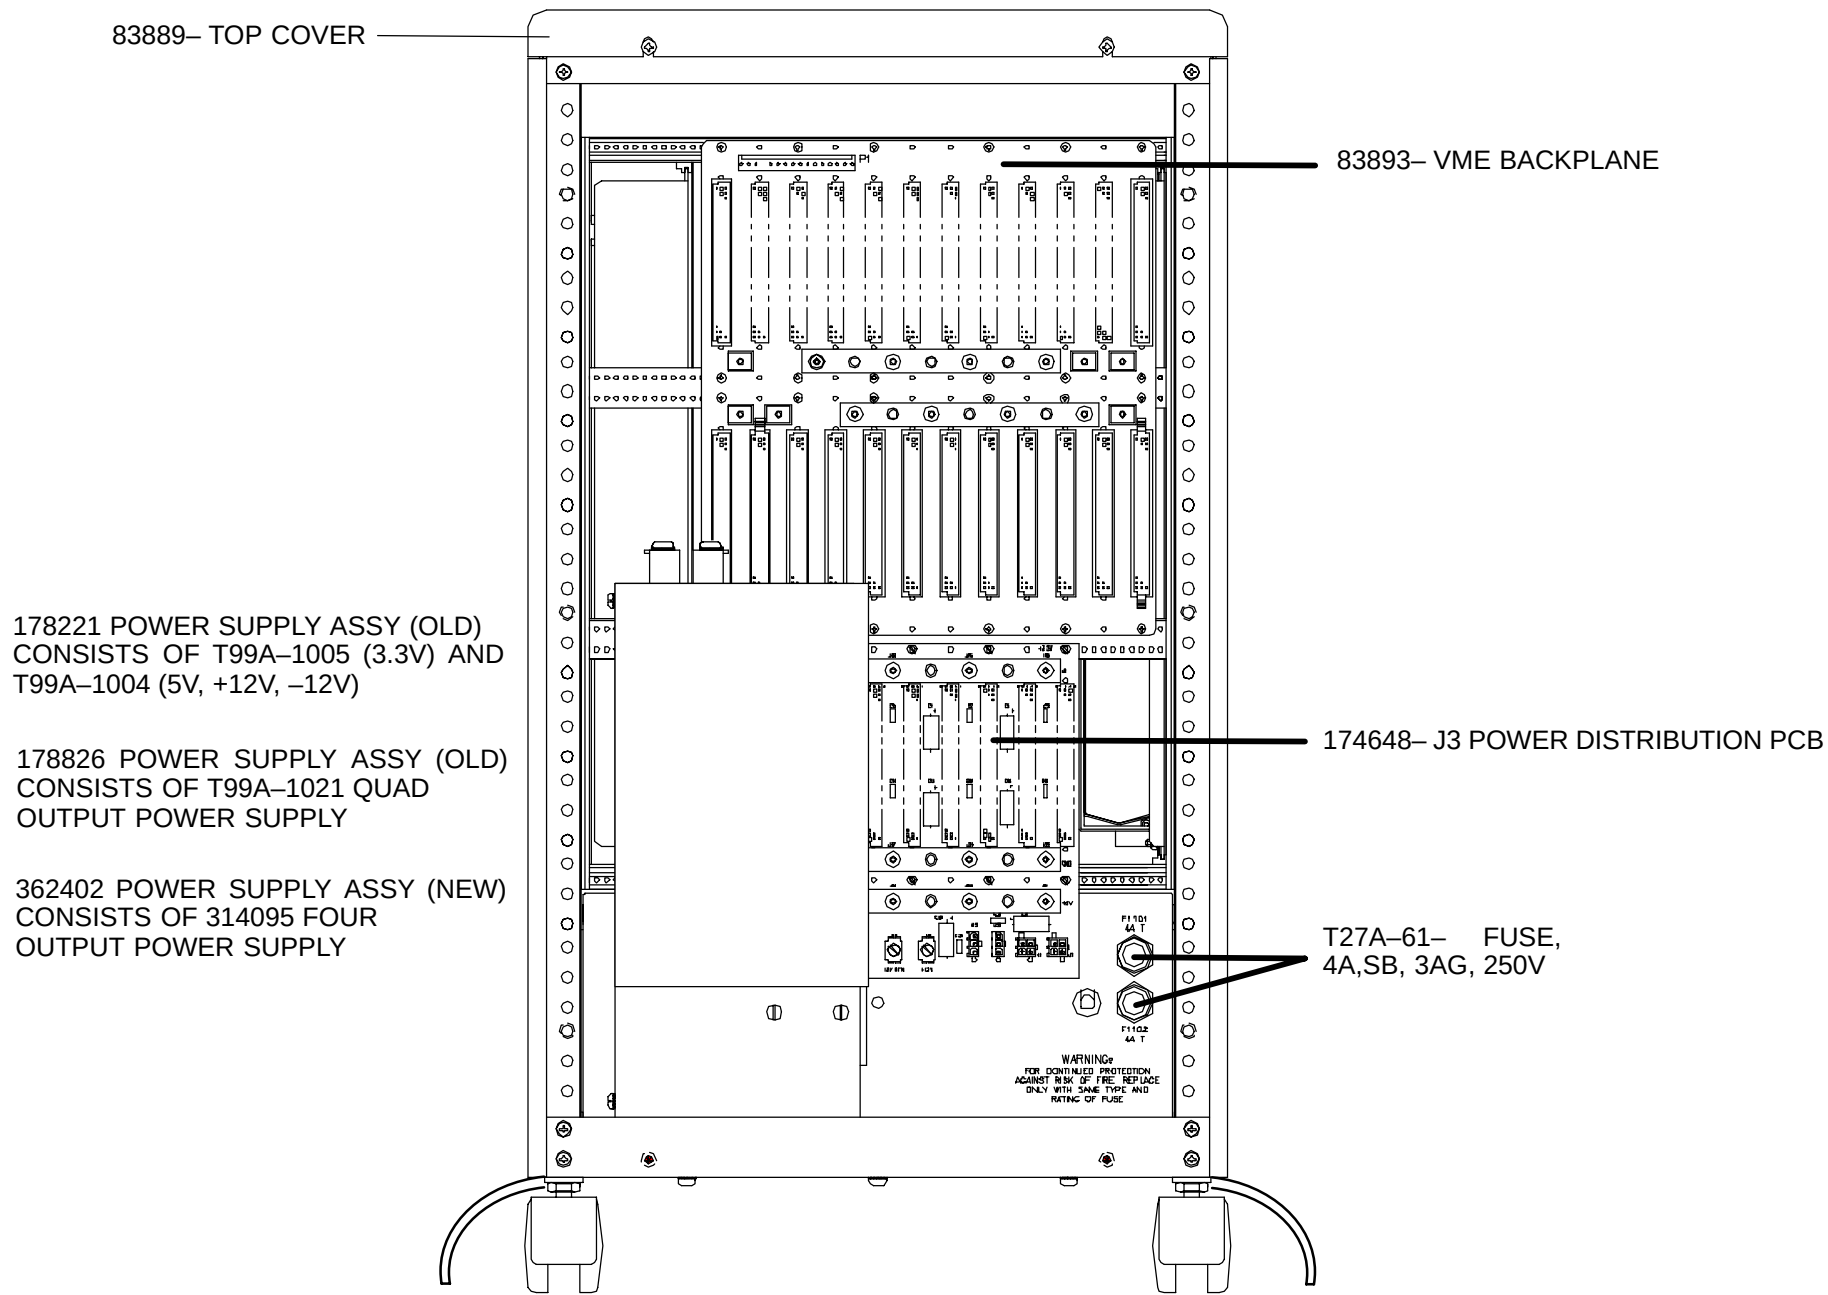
ACQIMAGE CABINET – ACQIMAGE BOARDS – (TYPICAL ASSEMBLY)
